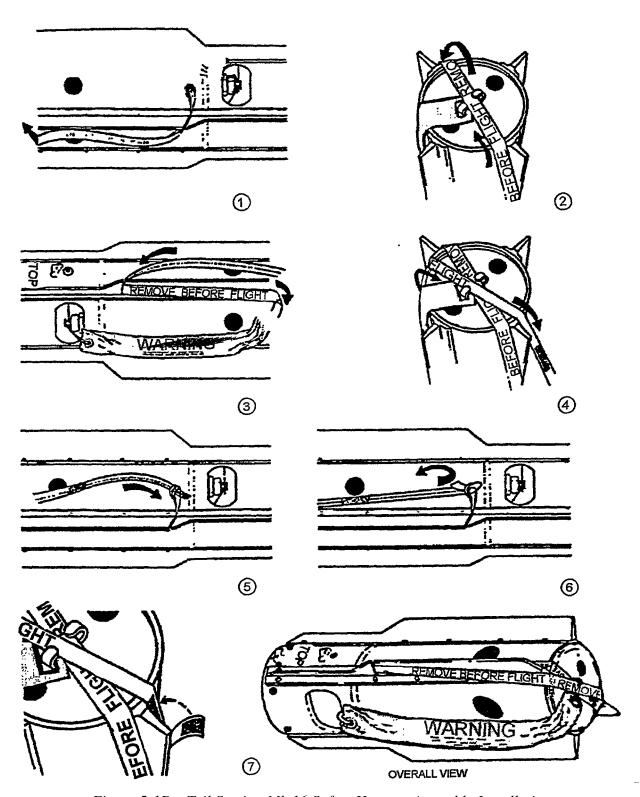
D. Tail Section Mk 16 Safety Harness Assembly Installation
